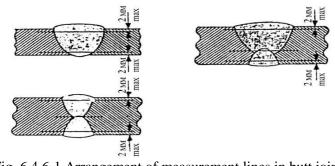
Arrangement of measurement lines in butt joints
